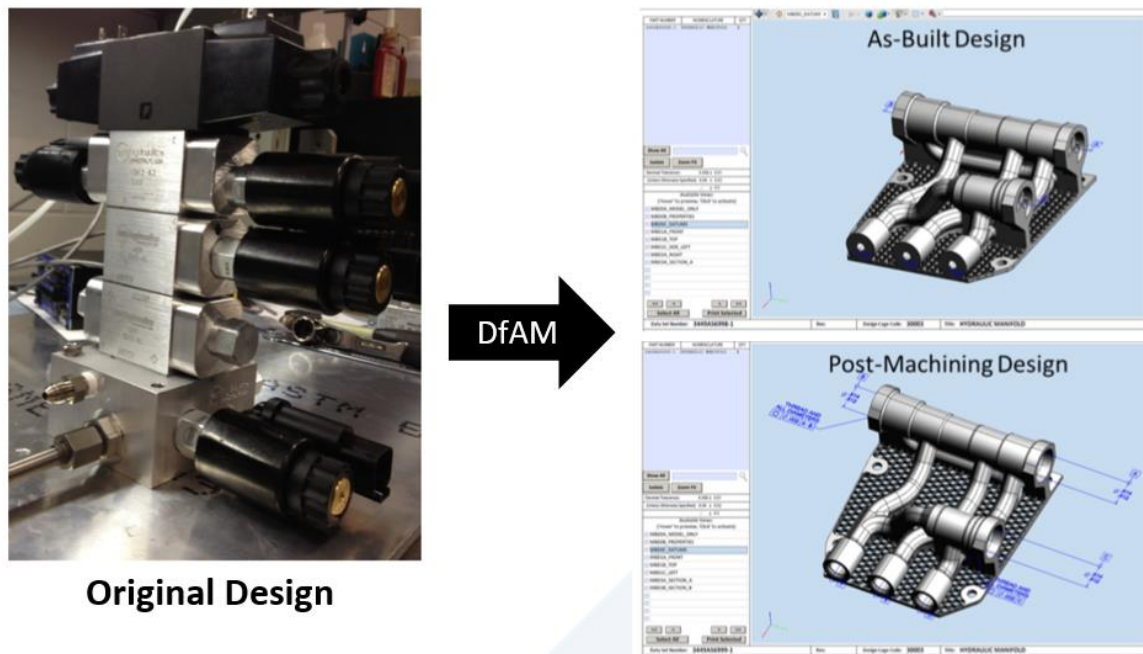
Picture of the original to final part with the two product definitions shown right. [6]
